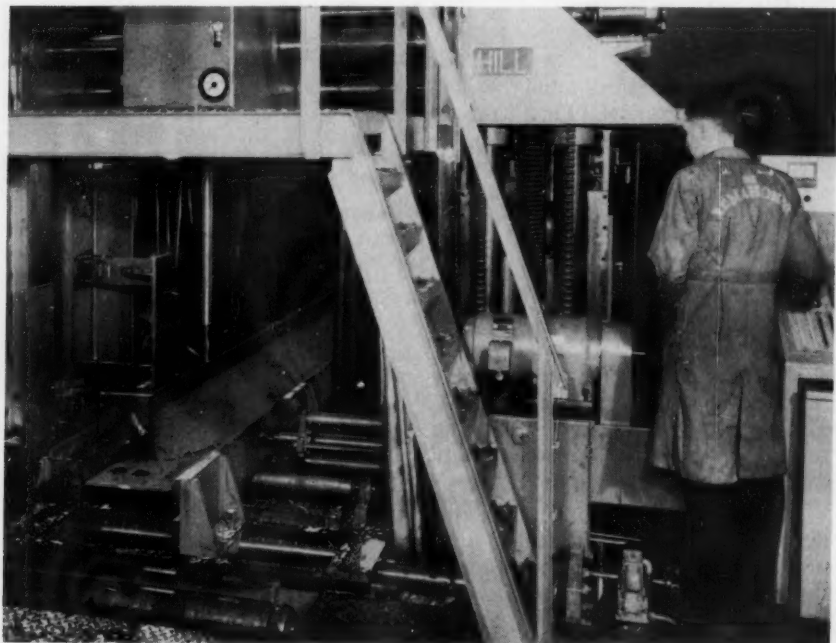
Drilling a large bridge beam on the Hill machine at the R. C. Mahon Detroit plant.
